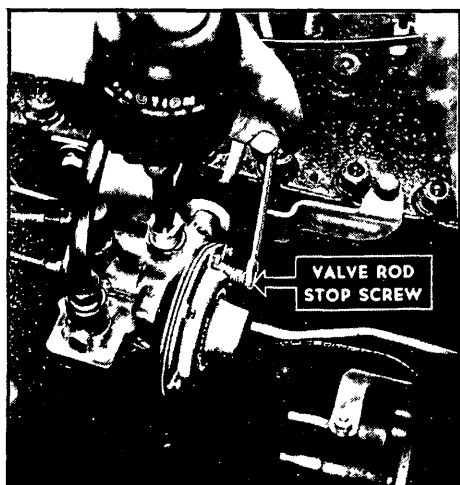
A Adjusting valve rod stop screw for fast start adjustments. 1946-50 Electromatic Clutch
